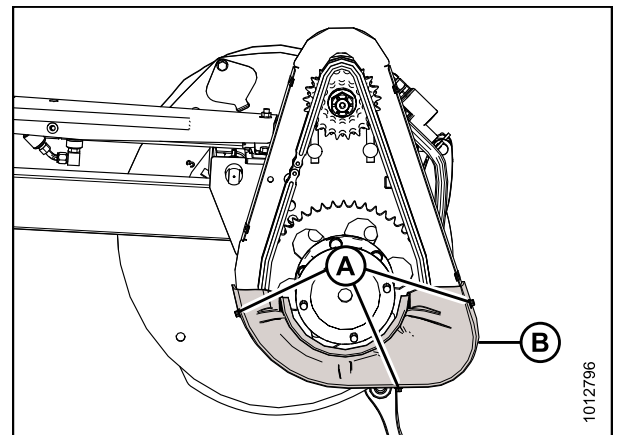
Lower Drive Cover (Upper Cover Removed)
